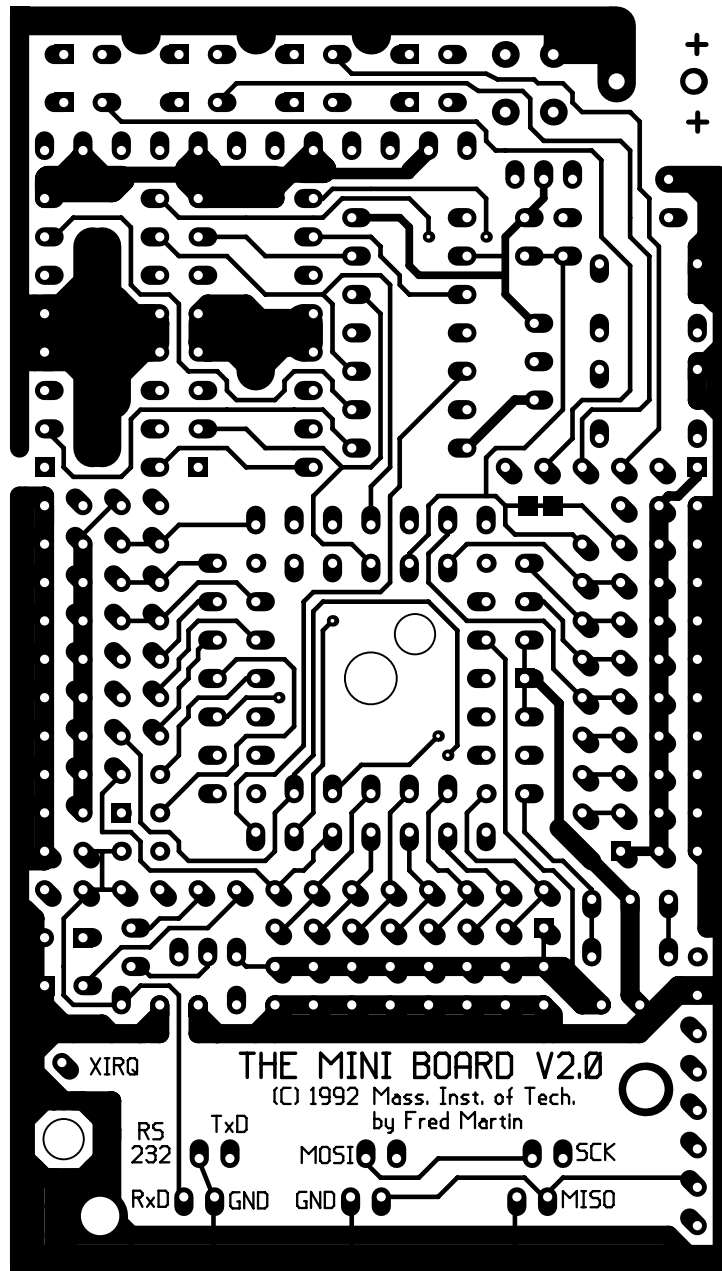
Mini Board 2.0, Solder Side, 2:1 Enlargement
